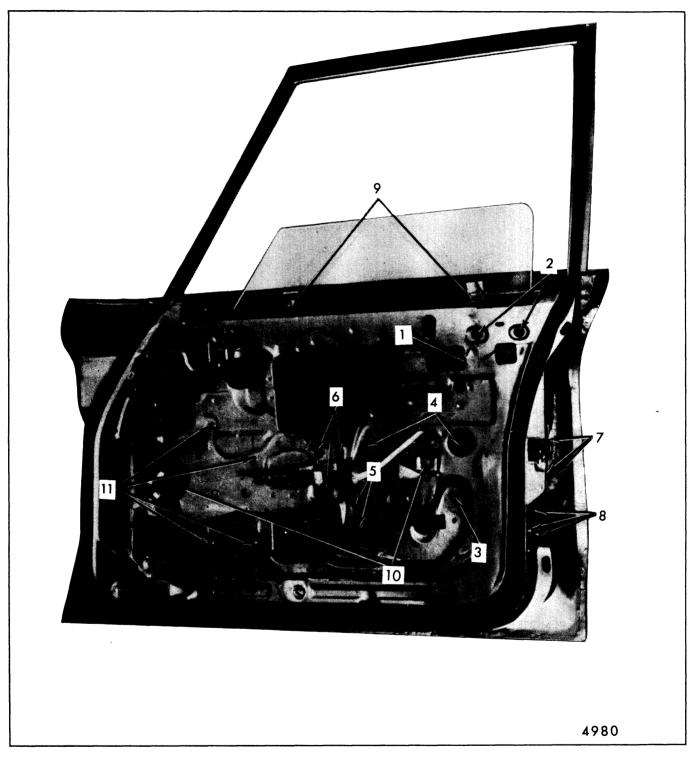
Front Door Hardware - "B" Four-Door Closed Styles
